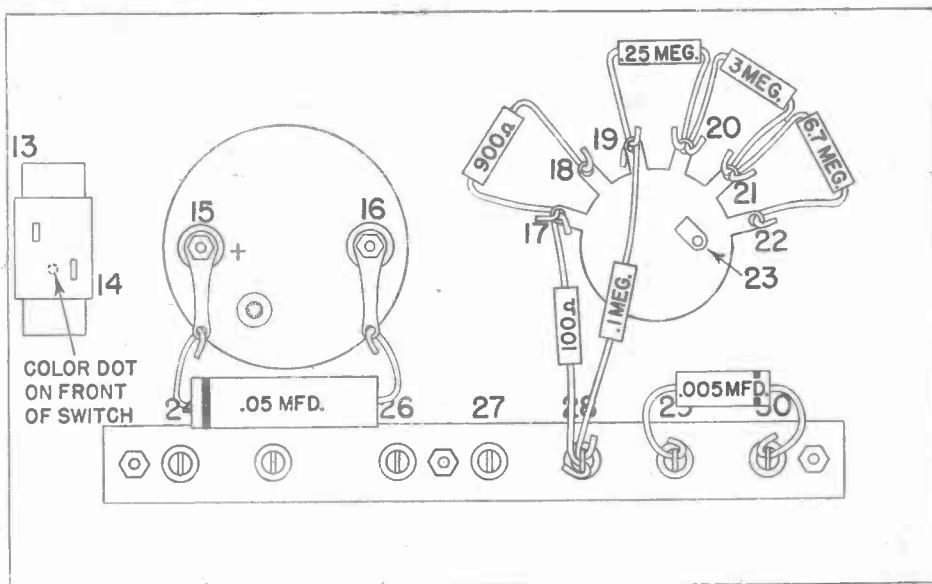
Rear view of front panel, showing positions of all condensers and resistors. No soldered joints have been made yet. All hook joints should be closed when instructions for this are given in the text.
